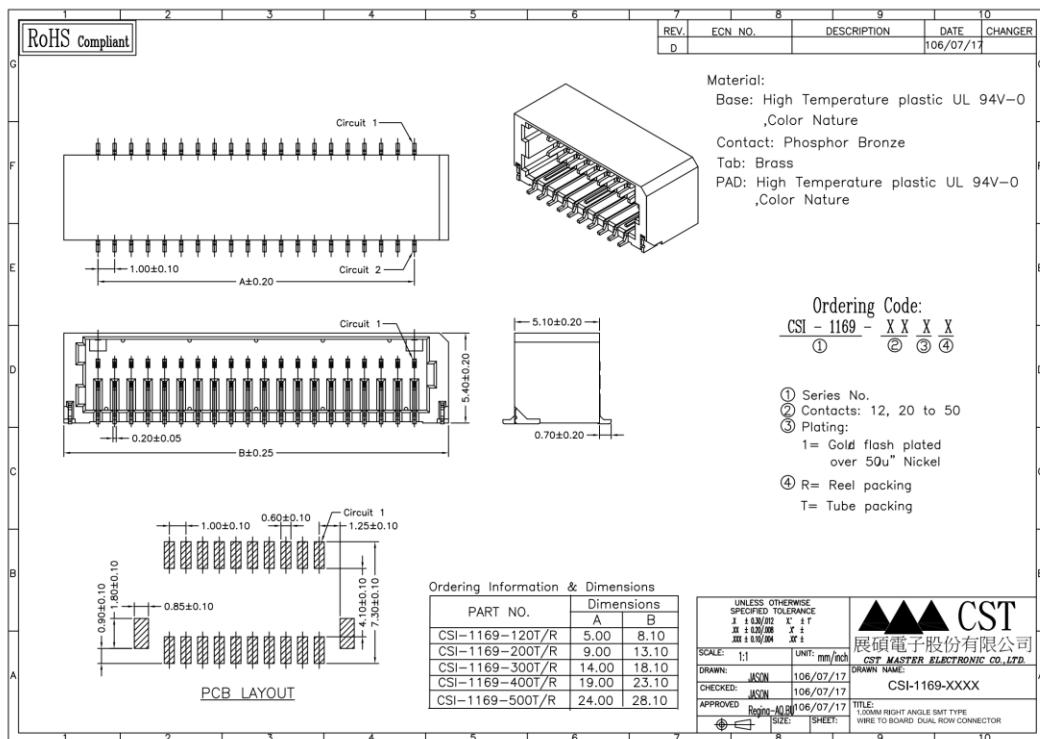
Wire to Board SMD 2*10P 180D Connector Drawing (CN2)
